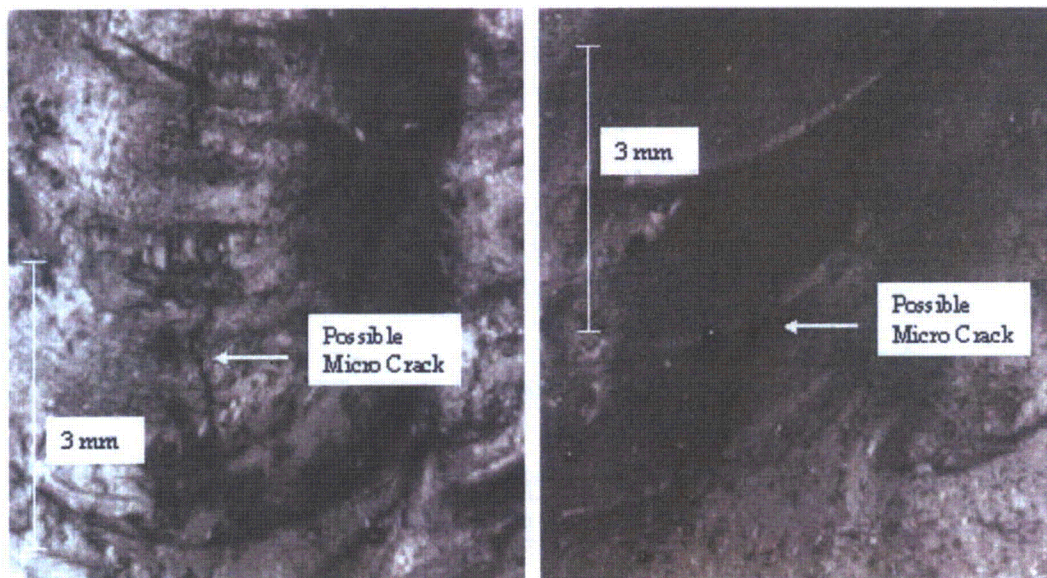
Small Crack-Like Indications near 120 Degrees in the J-Groove Weld Replica, Nozzle 59
